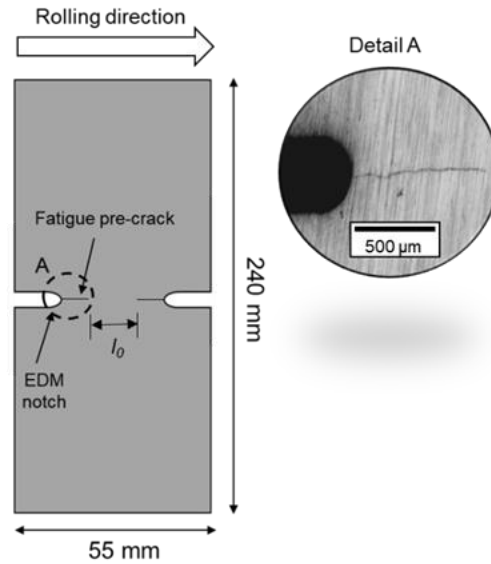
DENT specimen used for EWF tests and detail of the fatigue pre-crack at the notch root.
